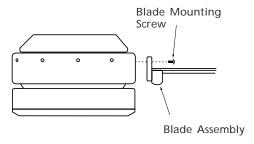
Attaching Blade Assembly to Hub of Fan Assembly
